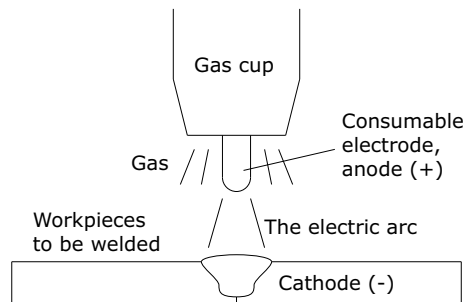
The gas metal arc welding (GMAW) process, also called the MIG/MAG welding process.
